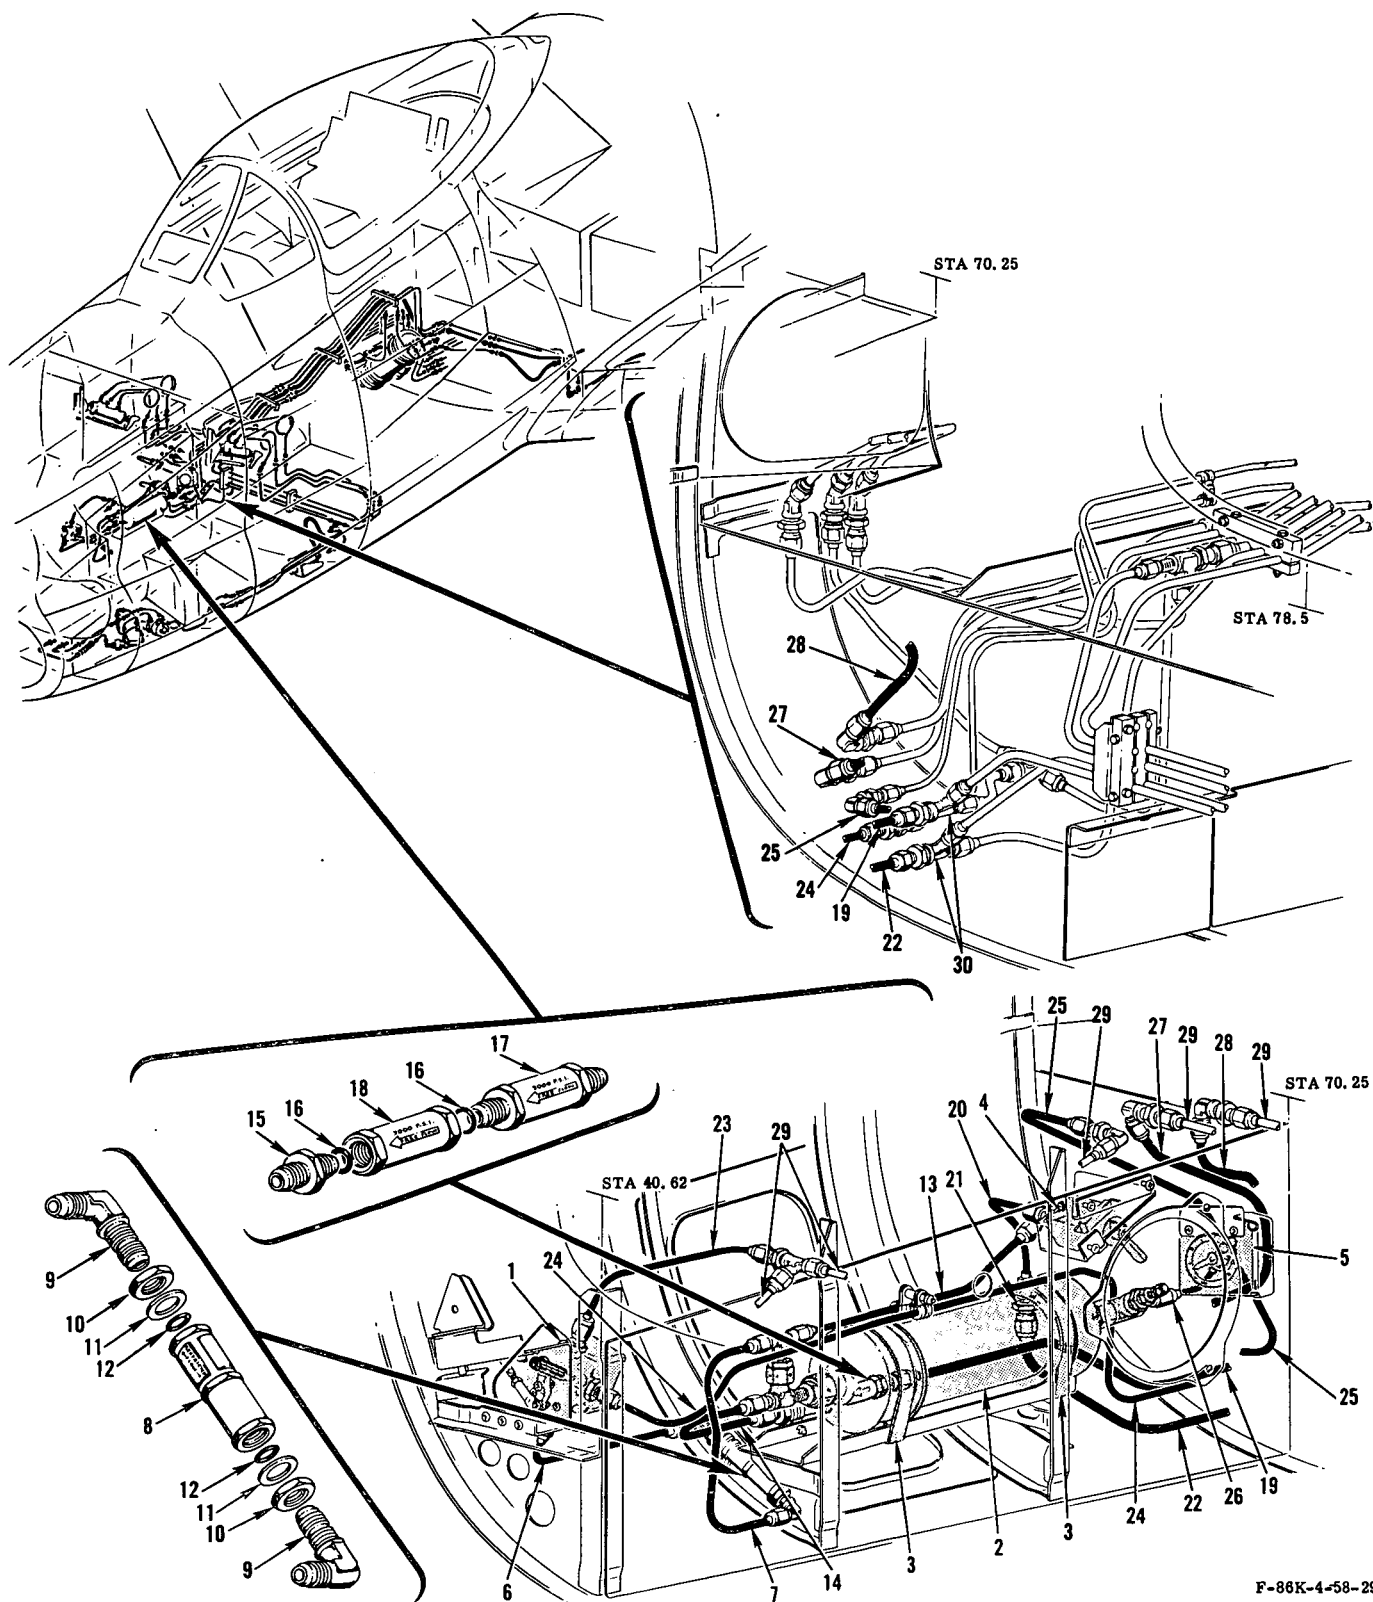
FUSELAGE STATION 12.75 TO 70.25 LOWER LH SIDE HYDRAULIC EQUIPMENT
